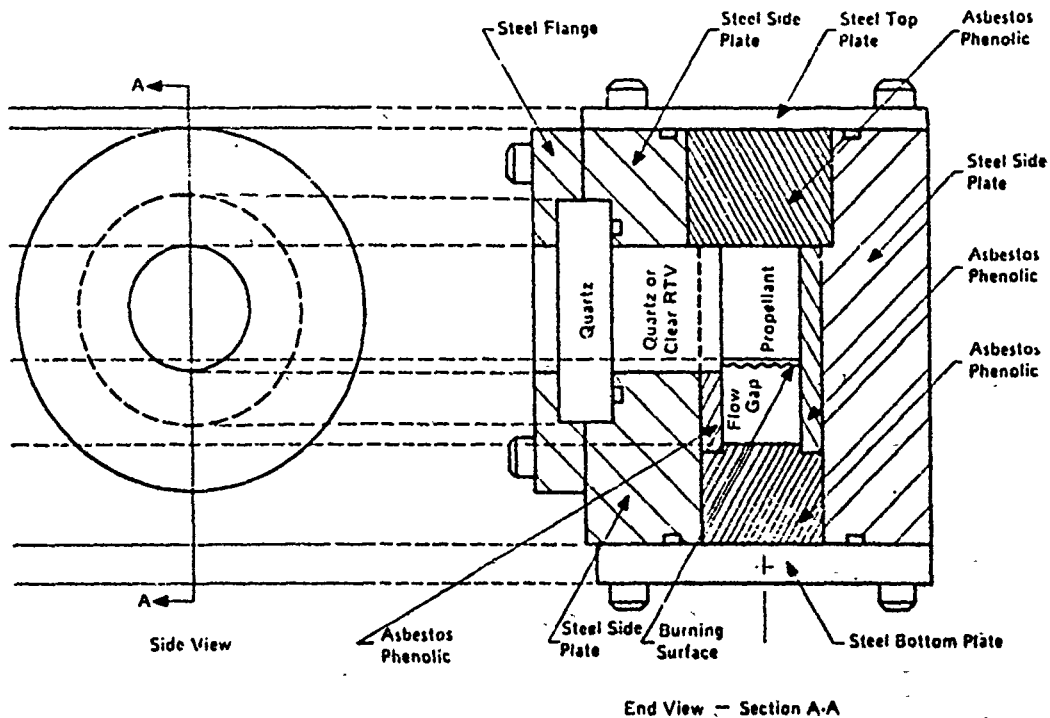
Test Section Detail, Emphasizing Viewing Windows.
